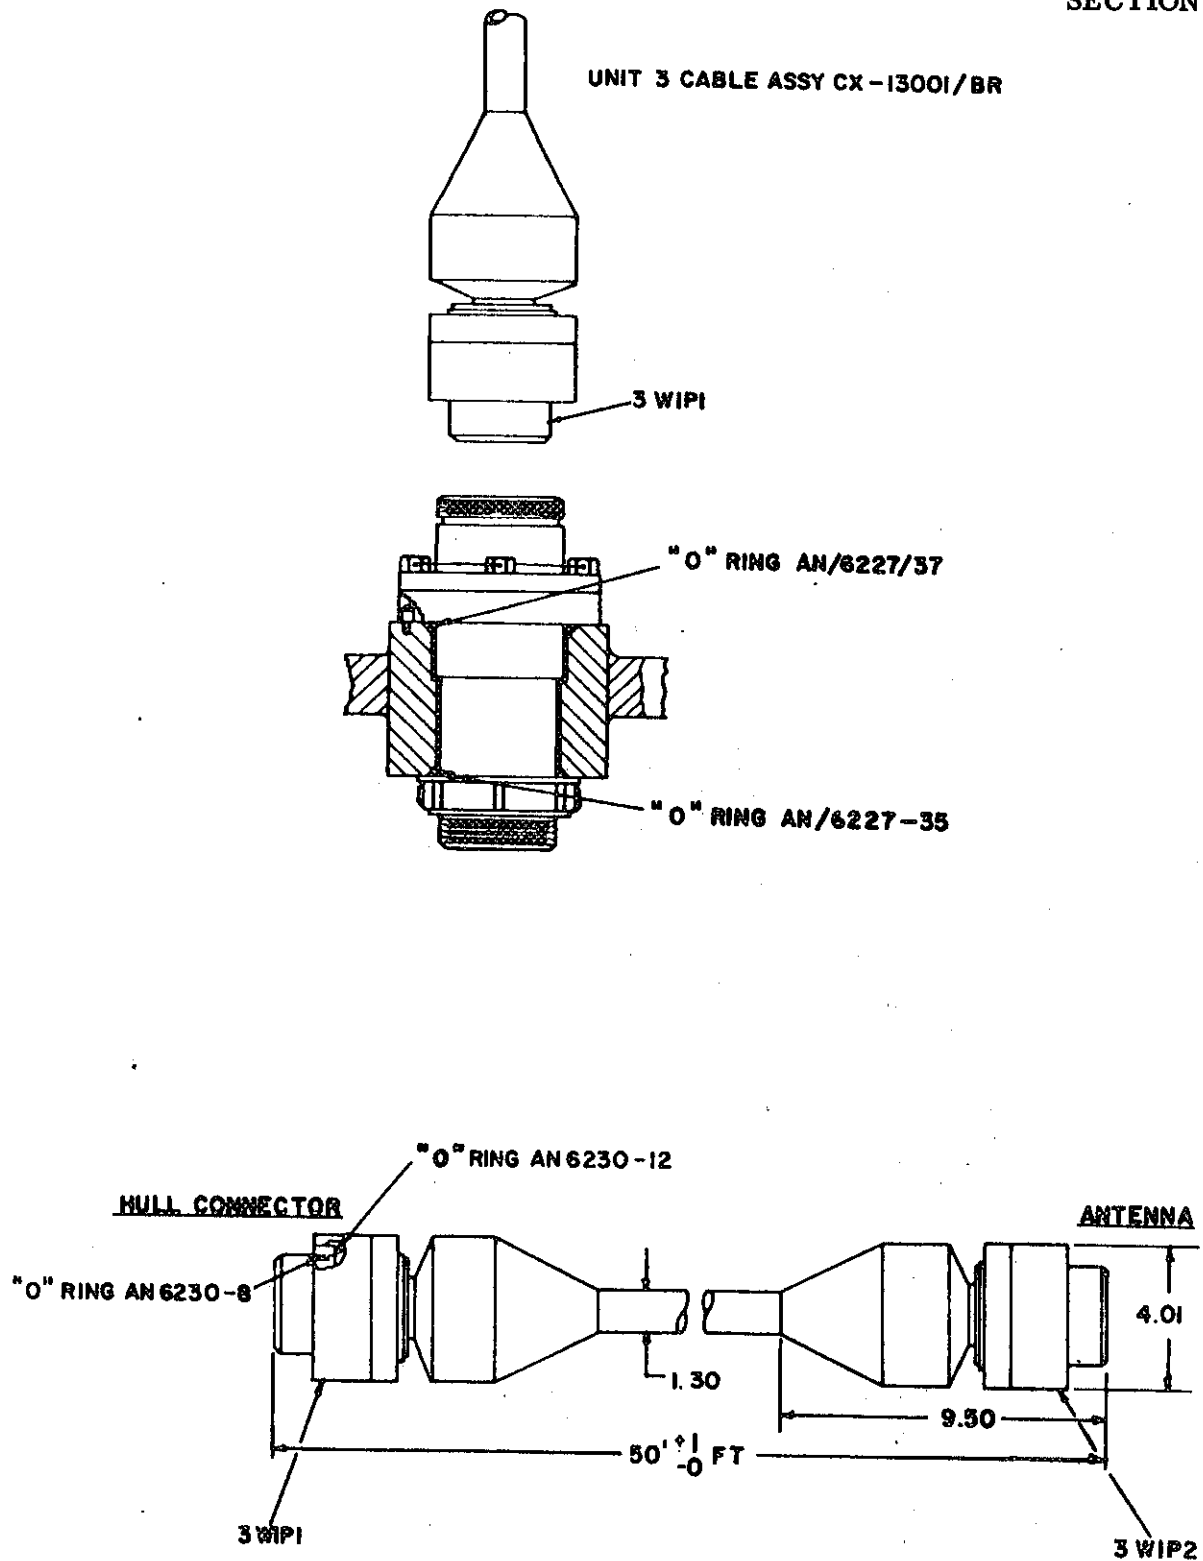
Cable and Hull Fitting O-Ring Assembly.
